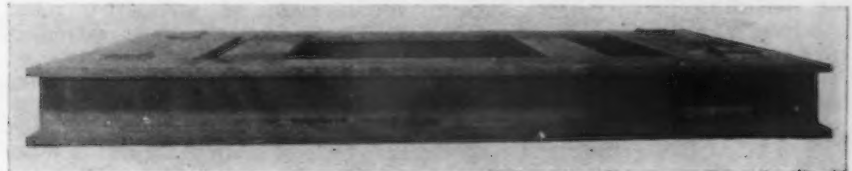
The pivot base for the lifting table is also made up of heavy H-beams. The flanges of the six cross beams were cut back and the ends inserted between the flanges of the two parallel beams and welded.
